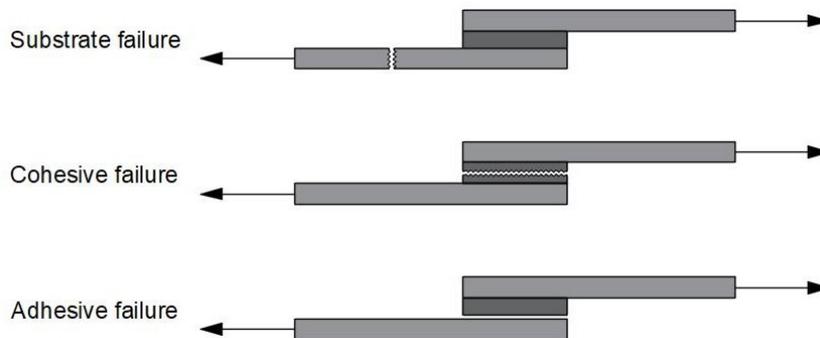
Failure mode of adhesives. An adhesive failure should be avoided.
